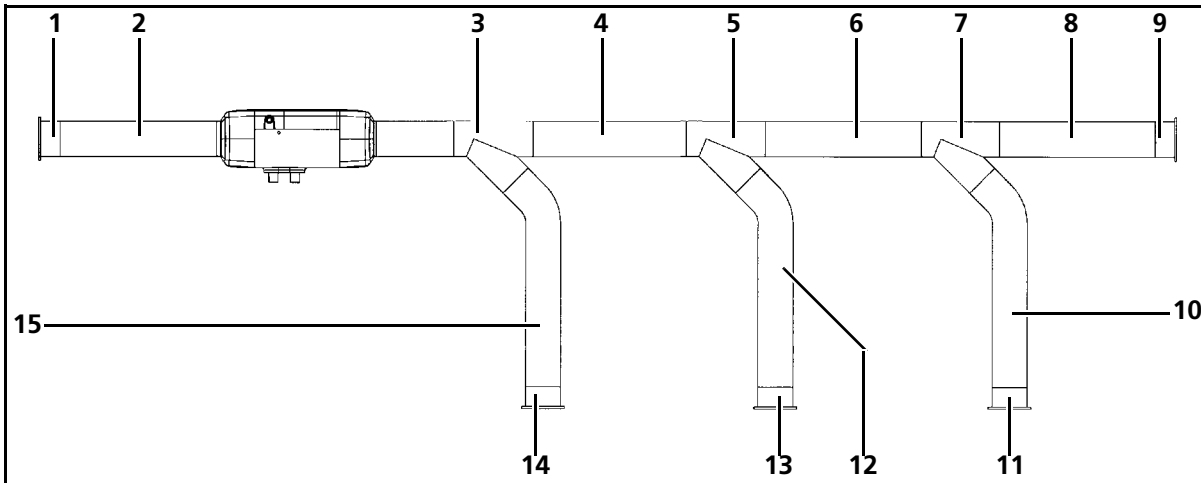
Air Top 3500 - Typical 3 Outlet Ducting Layout
